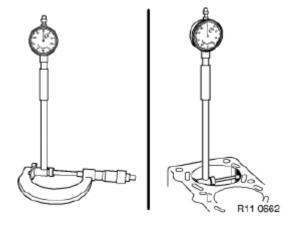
Measuring Diameter Of Cylinder Bore Courtesy of BMW OF NORTH AMERICA, INC.
